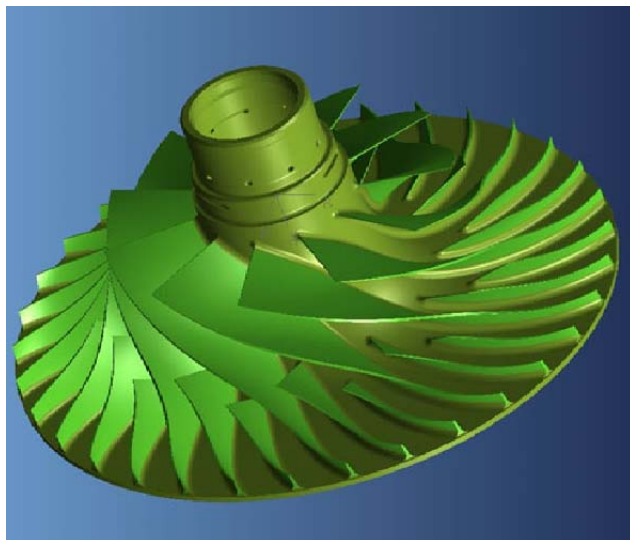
View of designed impeller of the 8:1 total pressure ratio centrifugal compressor
